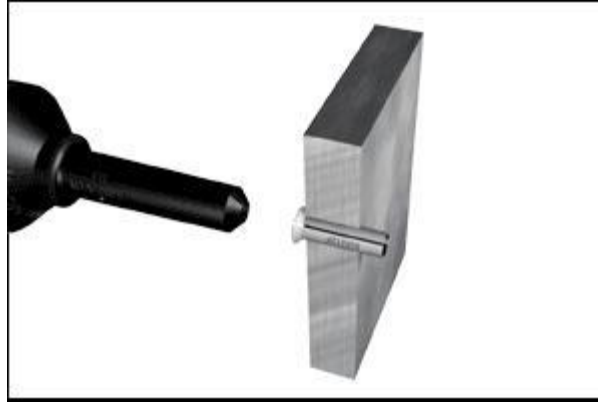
Cold Expansion Process. Remove and Discard Sleeve (Fatigue Technology 2011)
